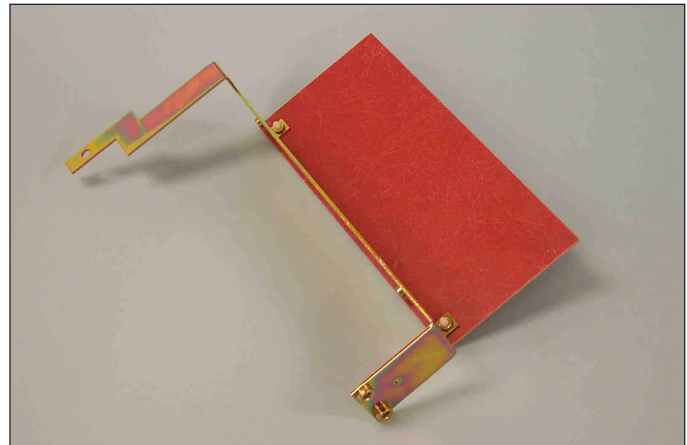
Insulation Barrier Installed on the Trip Unit Mounting Bracket (LAF-1600 C).
